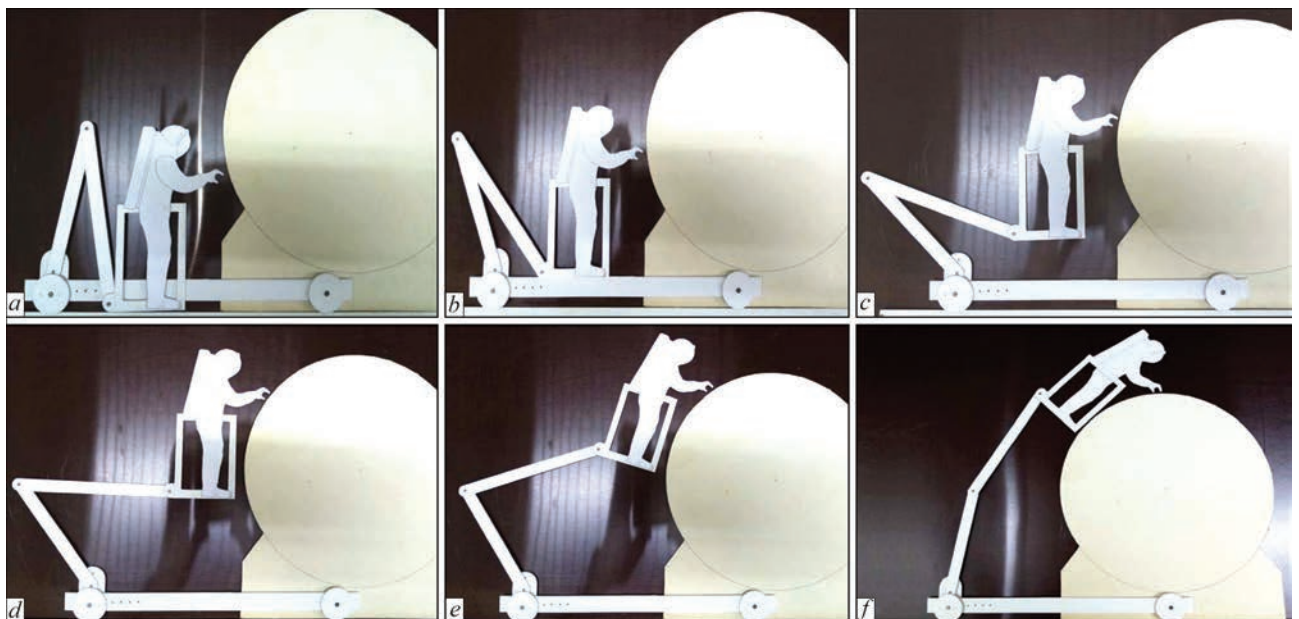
, *f* shows the upper position of the workplace, which enables servicing the module upper surface. This model allowed observing how the interaction of the operator, workplace and the module housing occurs during movement from the lower to the upper point, which commands the operator should issue from the control panel to the manipulator. The Table 1 gives the new dimensions of the welding operator workplace.
